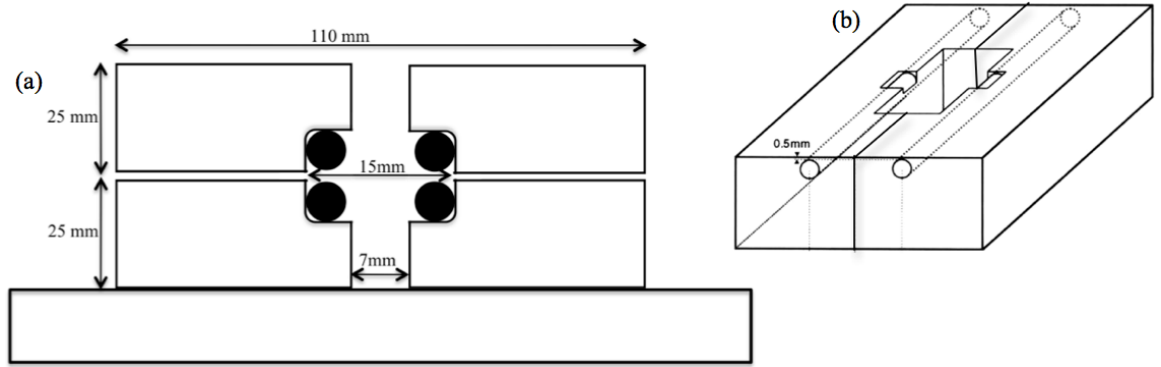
(a)Cross sectional view through the top and bottom block. (b)showing placement of silver steel rods in the bottom supporting block.
